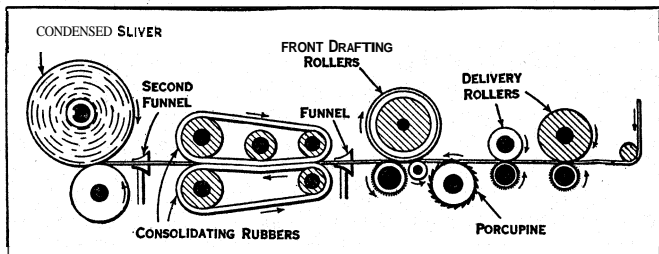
SECTION OF FRENCH DRAWING-BOX
